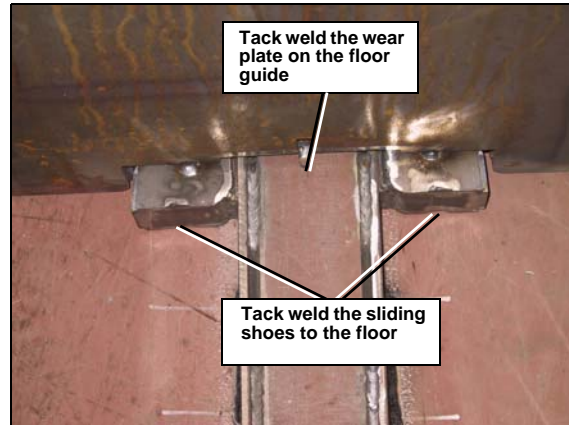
Tack weld the sliding shoes and wear plates
